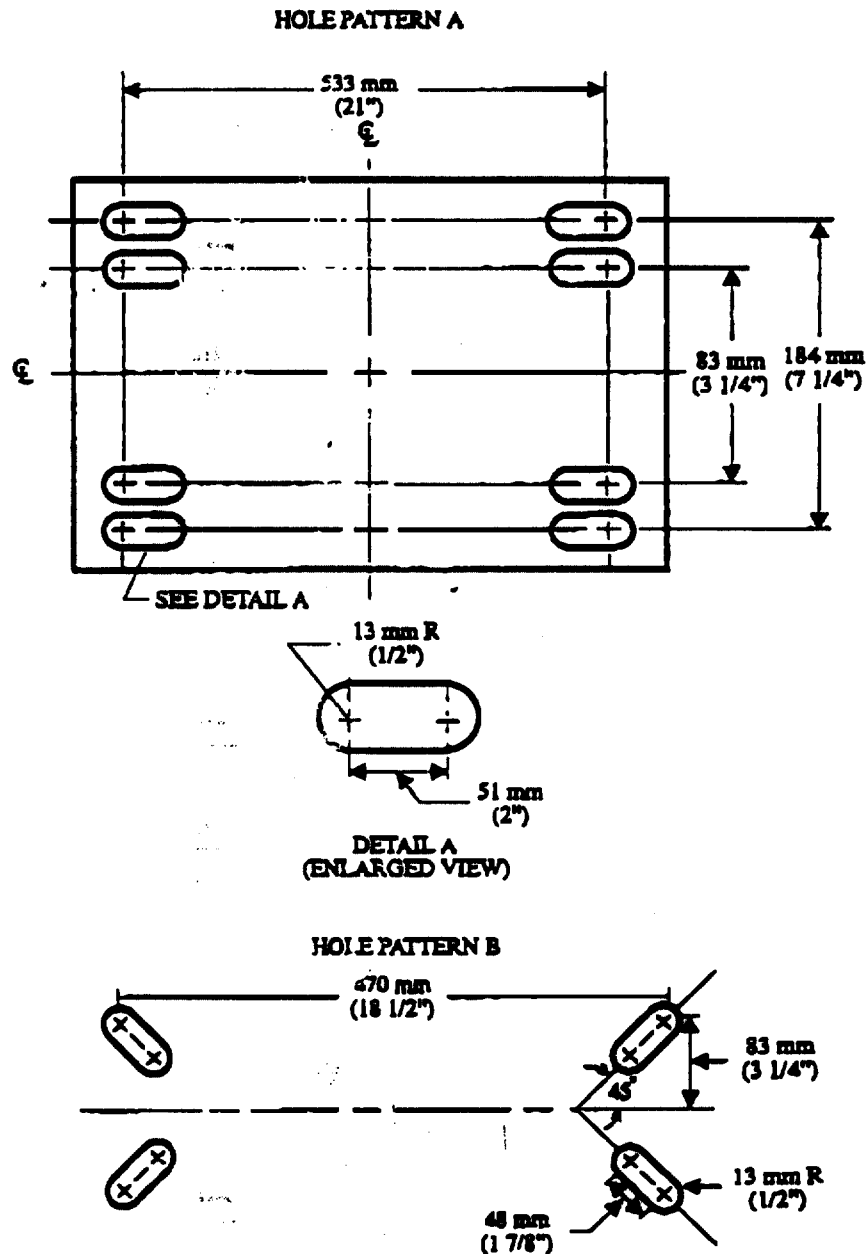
Framework Base (Typical) — Floor Anchoring Hole Pattern
